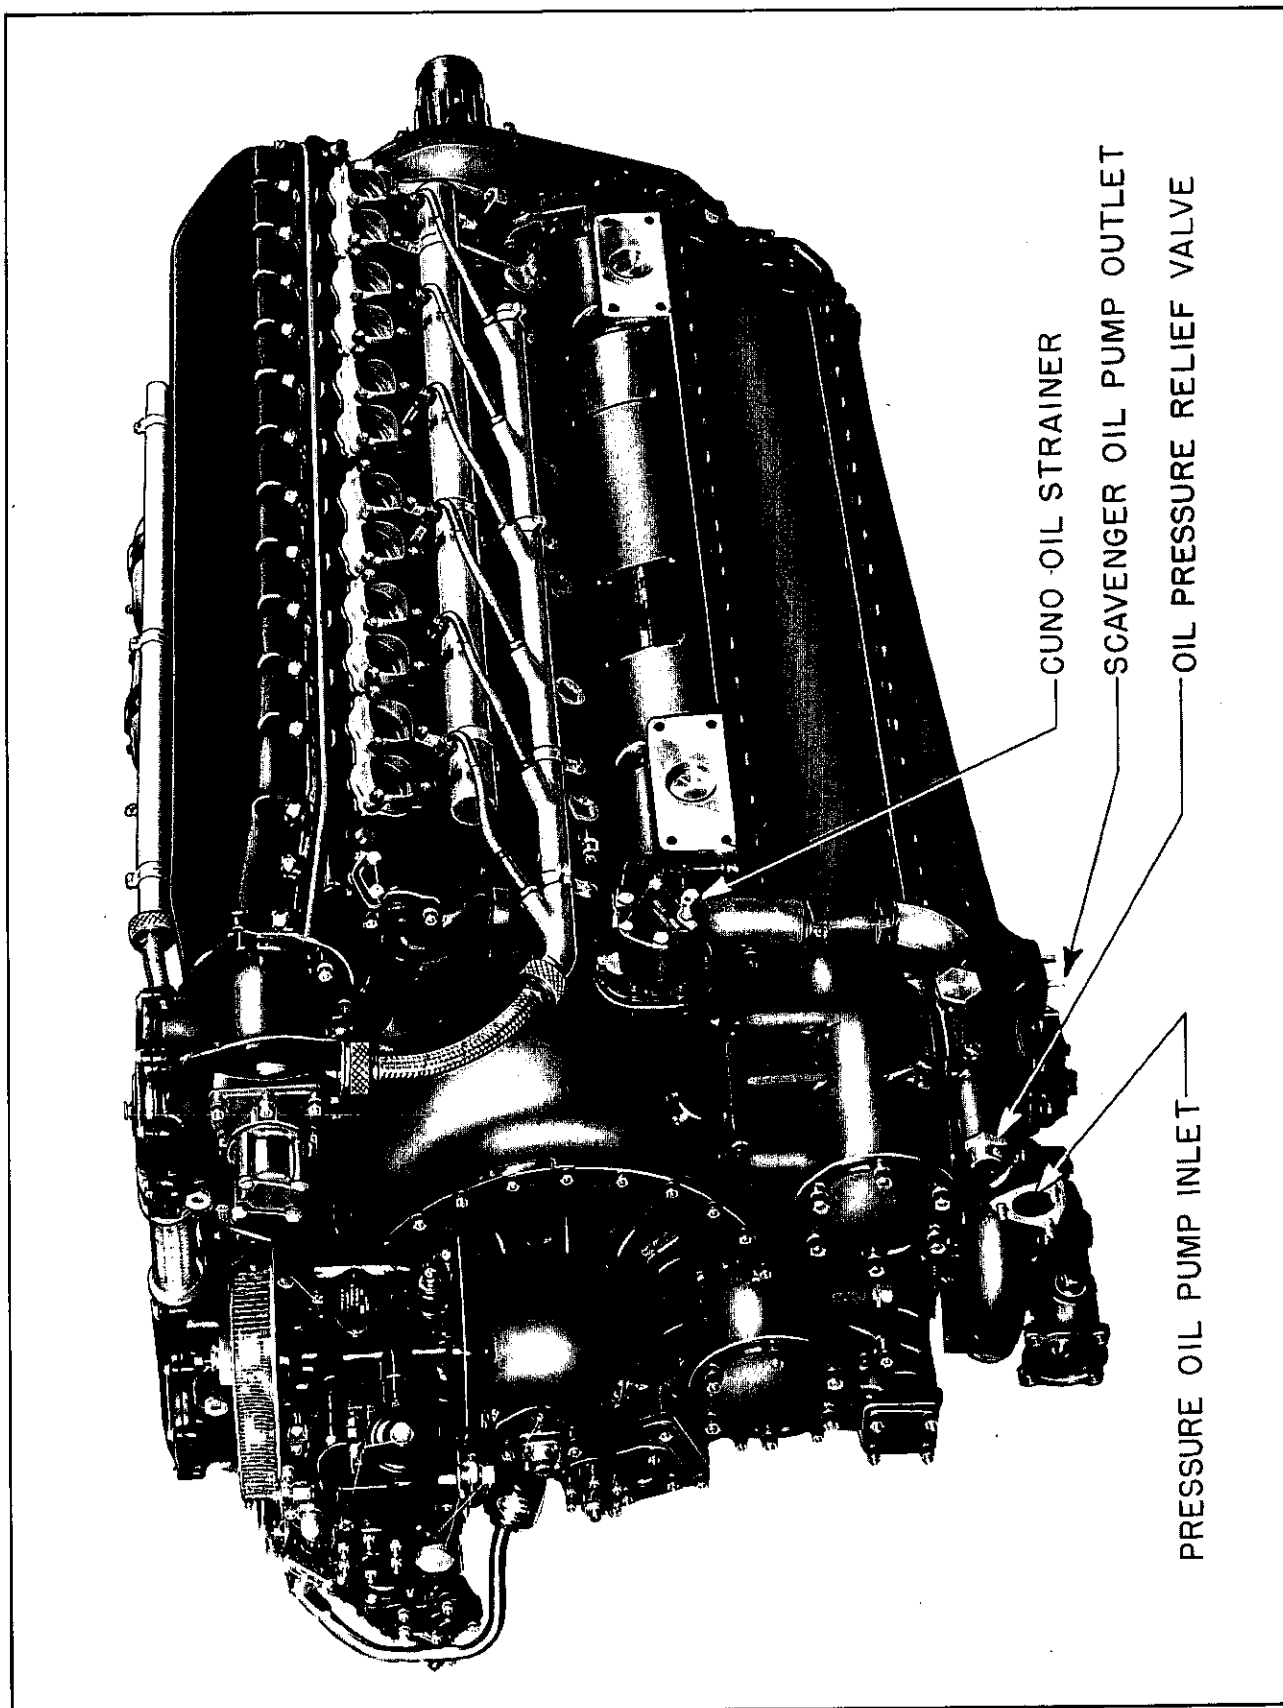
$\frac{3}{4}$ Right Rear View—V-1710-F3R Model Engine.
